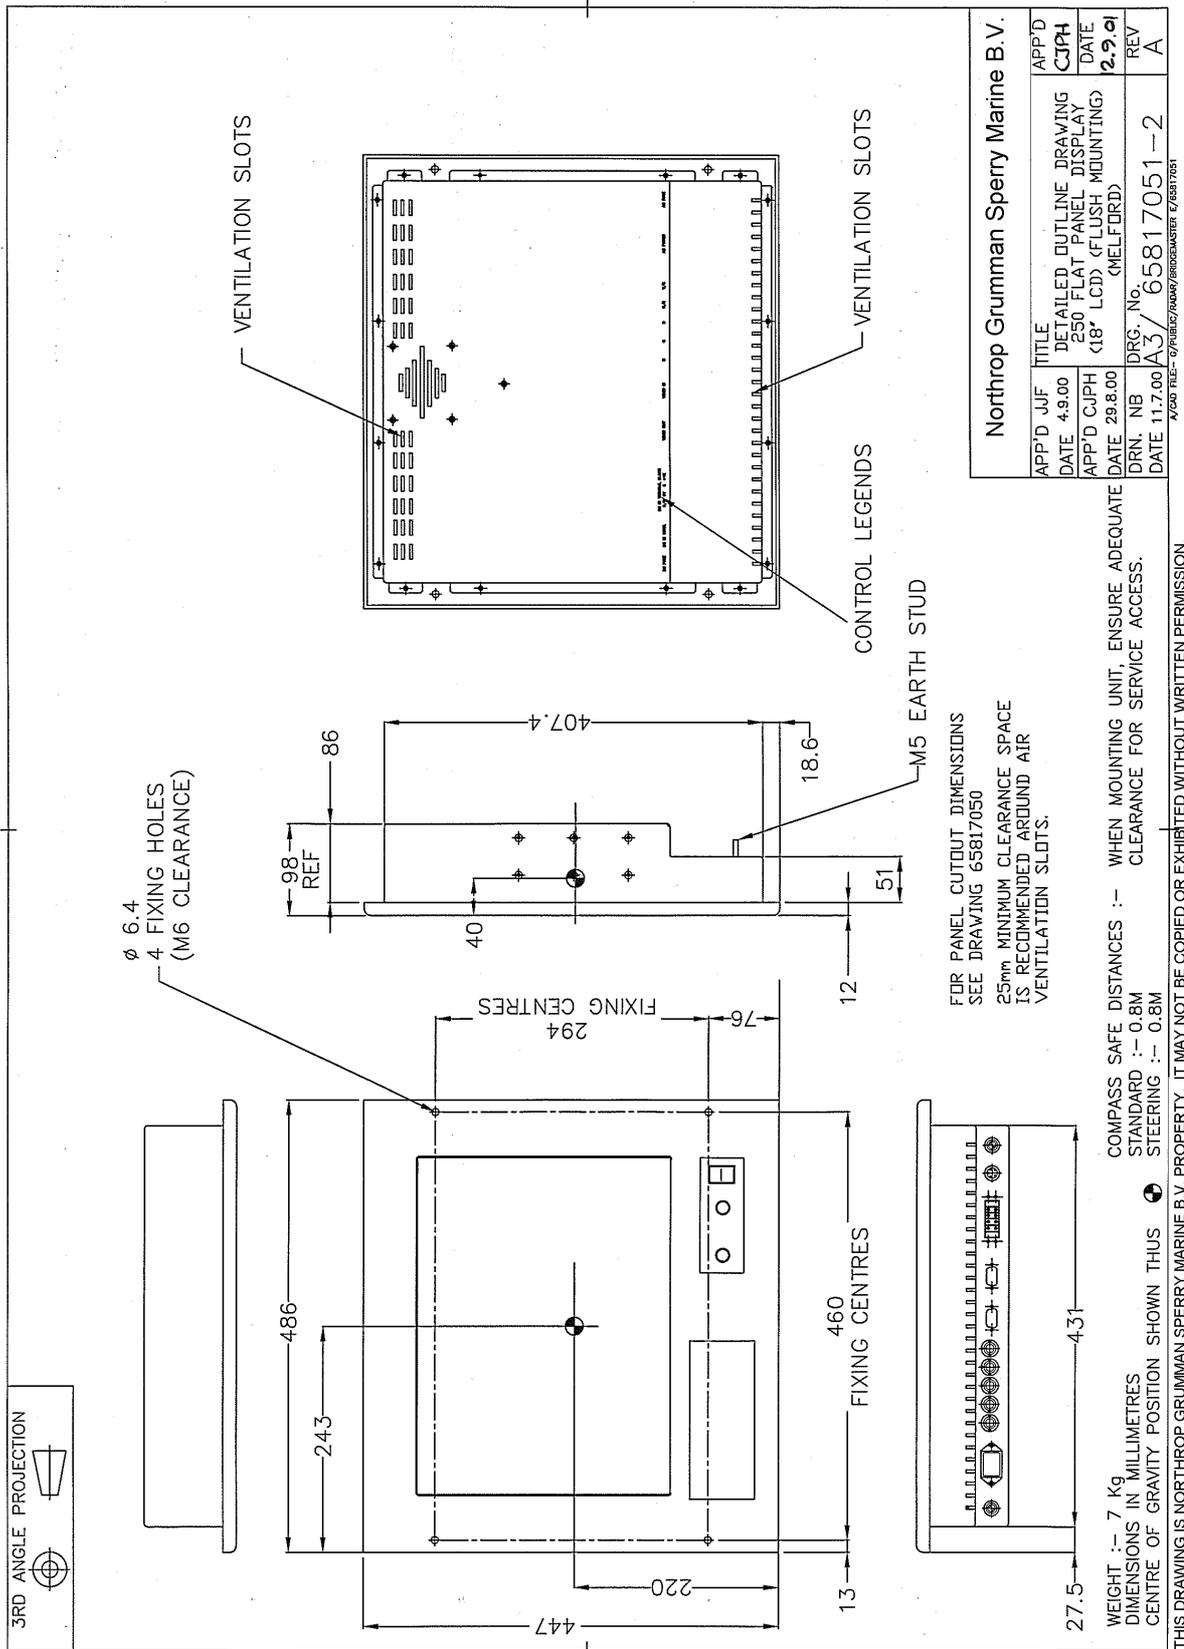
250 Monitor Module (FPD 18") Outline Drawing
